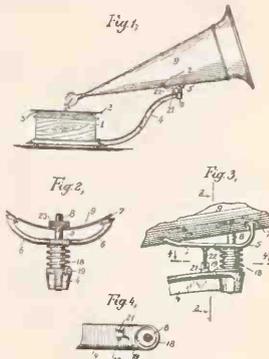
is an elevation of a talking machine; Fig. 2 is a section through the support and cradle on line 2-2 of Fig. 3; Fig. 3 is an enlarged detail view of some of the parts shown in Fig. 1; and Fig. 4 is a detail view in section on line 4-4 of Fig. 3.
